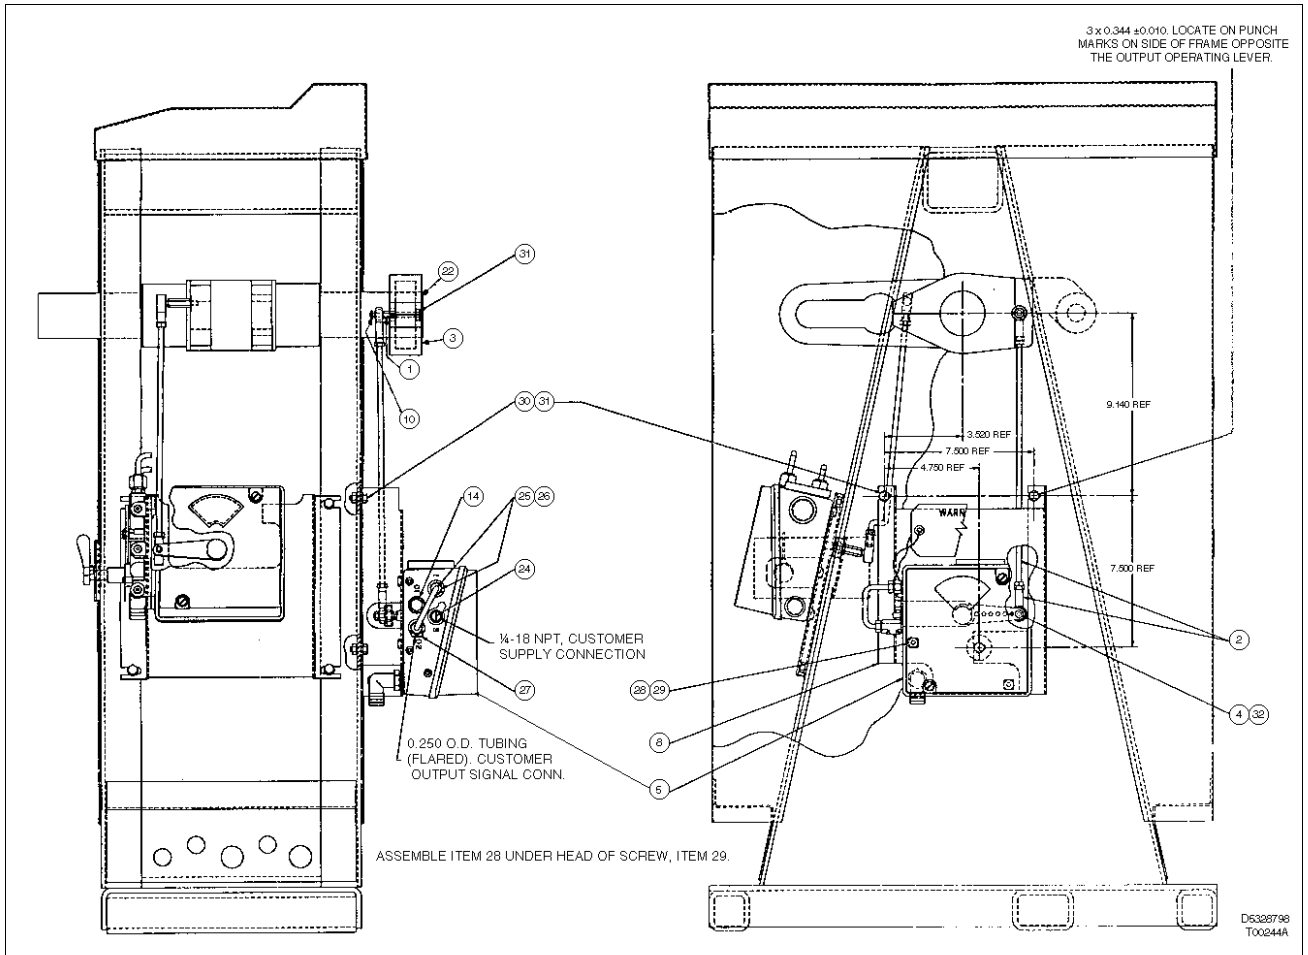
UP3 and UP4 with Pneumatic Shaft Position Transmitter, Table A-26
